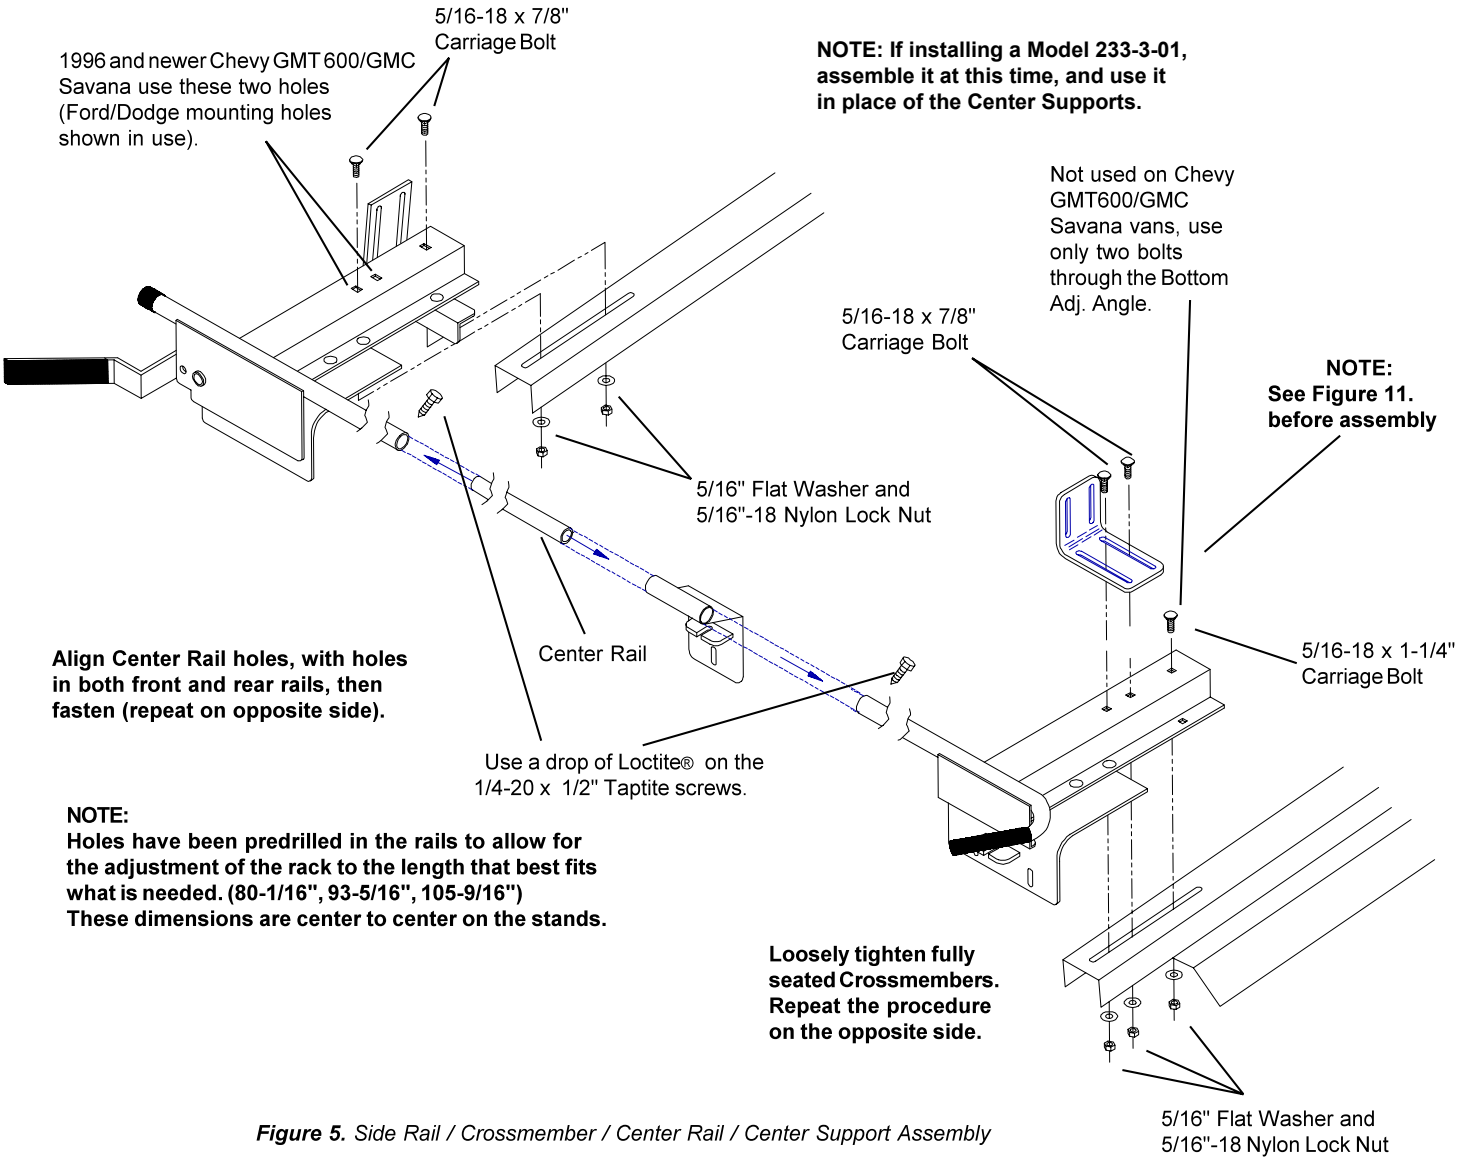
Side Rail / Crossmember / Center Rail / Center Support Assembly
